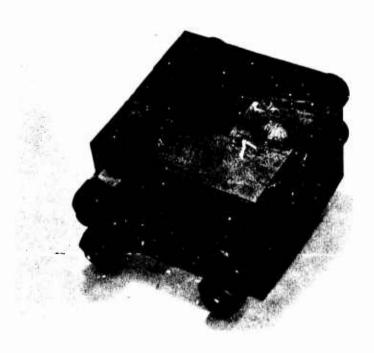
91LD resin-boron fiber plies stacked in one-inch square mold prior to molding. (HAC Photo No. R109192)
